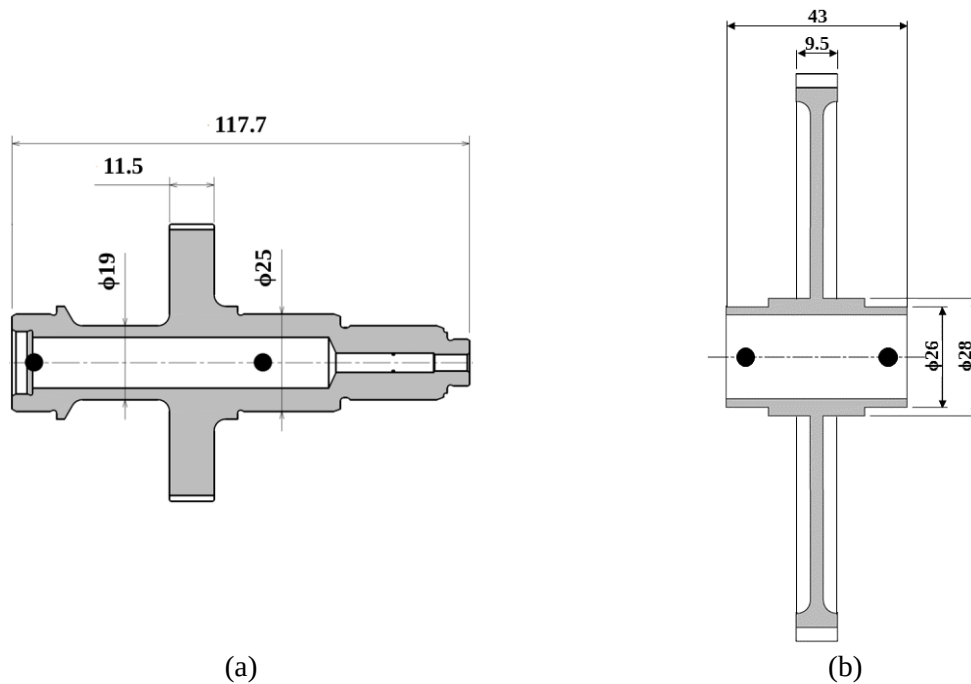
Geometry for (a) pinion and (b) wheel of the spur test case
